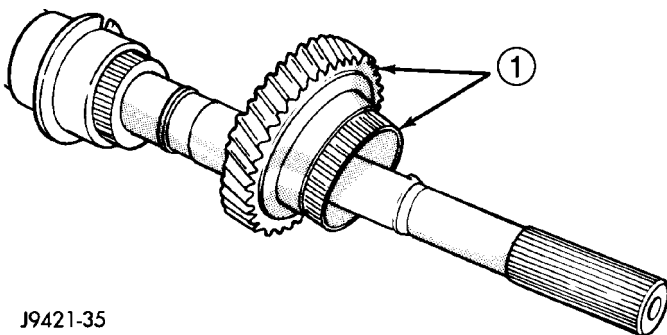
REVERSE GEAR AND NEEDLE BEARING
